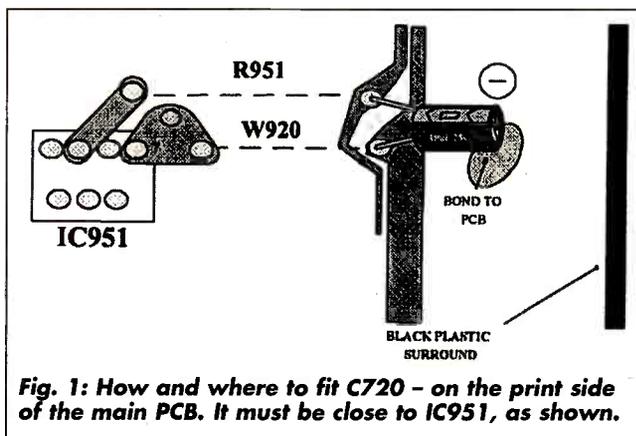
How and where to fit C720 – on the print side of the main PCB. It must be close to IC951, as shown.
